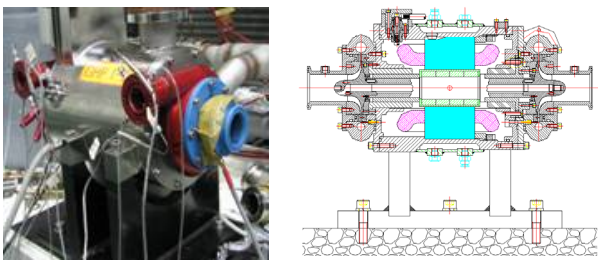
Picture and draft of turbo refrigerant compressor using air foil bearings
